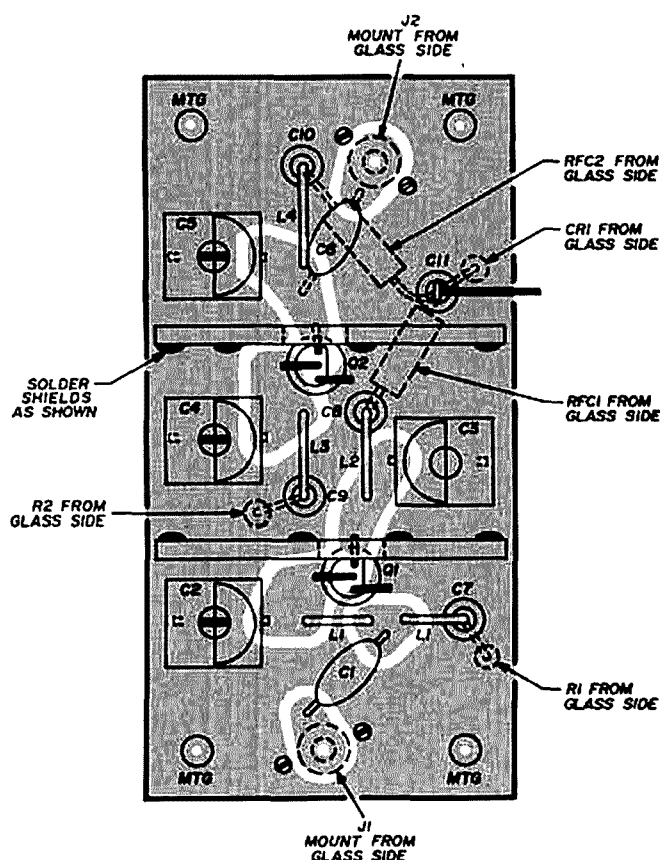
Component layout for the uhf preamplifier. Circuit board is shown in fig. 6.
